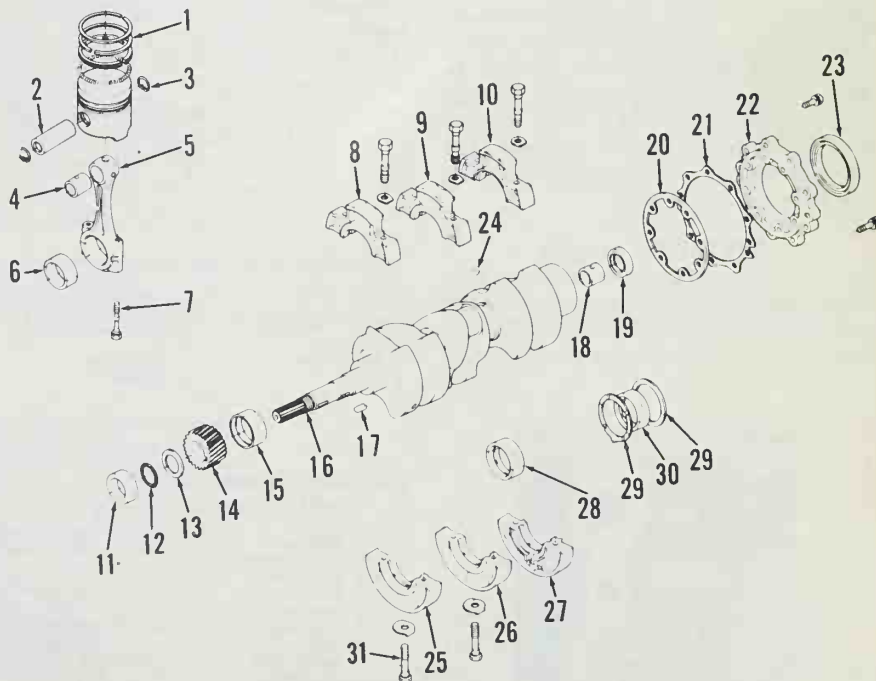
Exploded view of piston, rod and crankshaft assembly.
